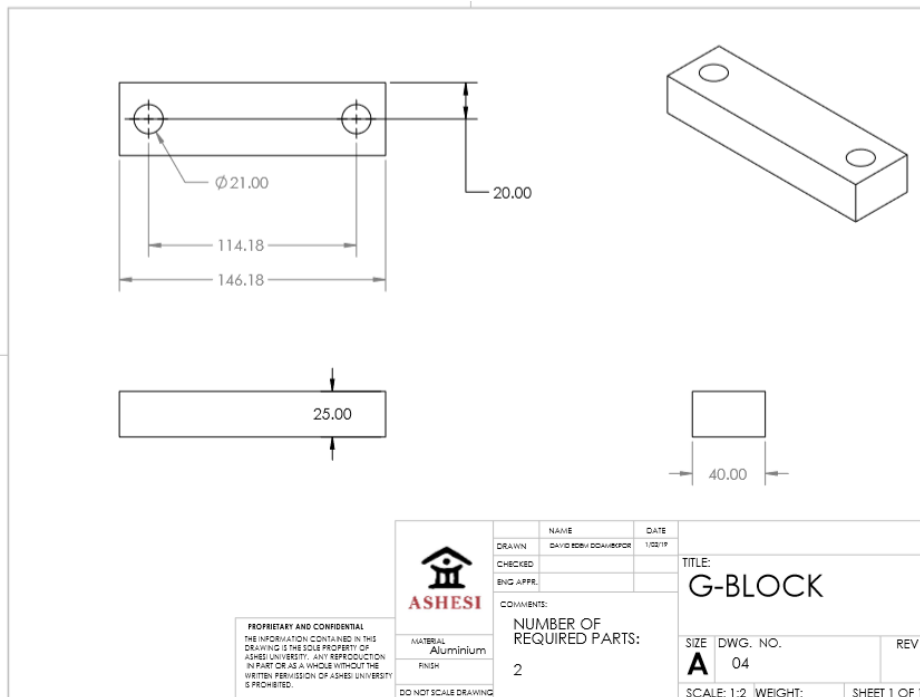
Drawing Dimensions for the Governing Block fixture
